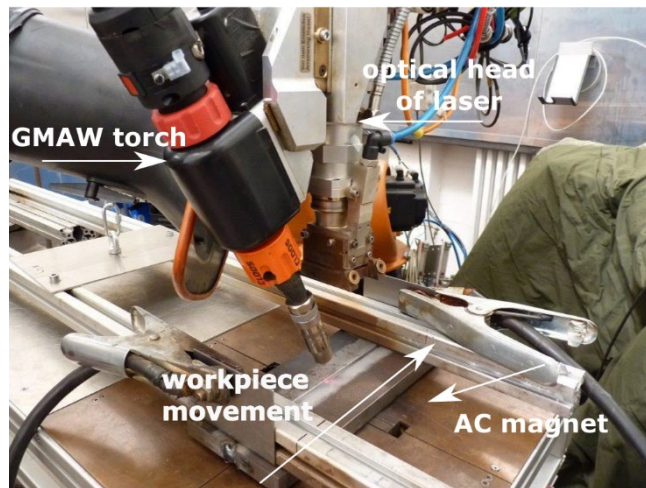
Experimental Setup of hybrid laser-arc welds with electromagnetic weld pool support
